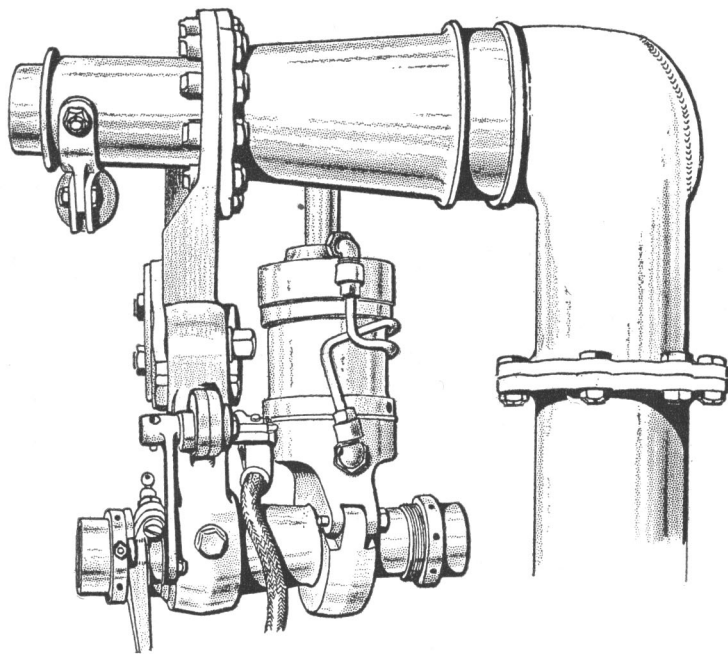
A view looking down at the hydraulic jack, landing gear strut tube and pivot and locking links (at left) in retracted position. The jack piston rod is attached to a lever on the pivot shaft but hidden from view. The pivot shaft is carried on two bearings: a large one at the right and a smaller one at the left.
